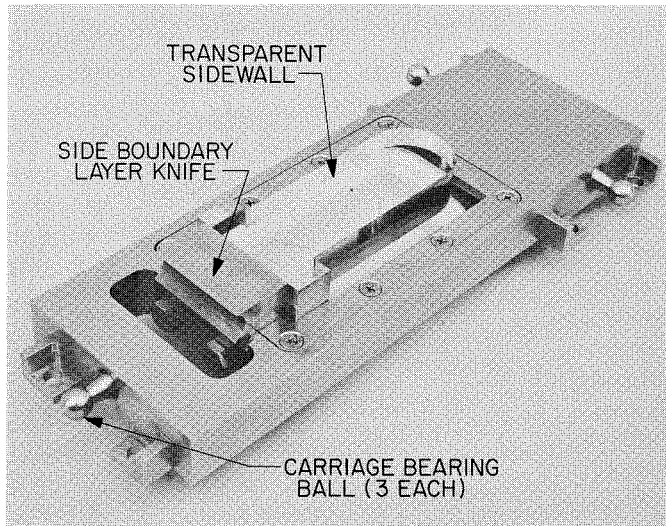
Side wall carriage assembly showing inner face and side boundary layer knife assembly
